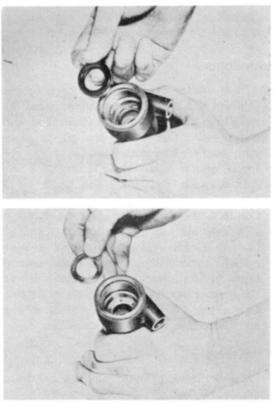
Inserting Piston Cup Spacer & Piston Cup
